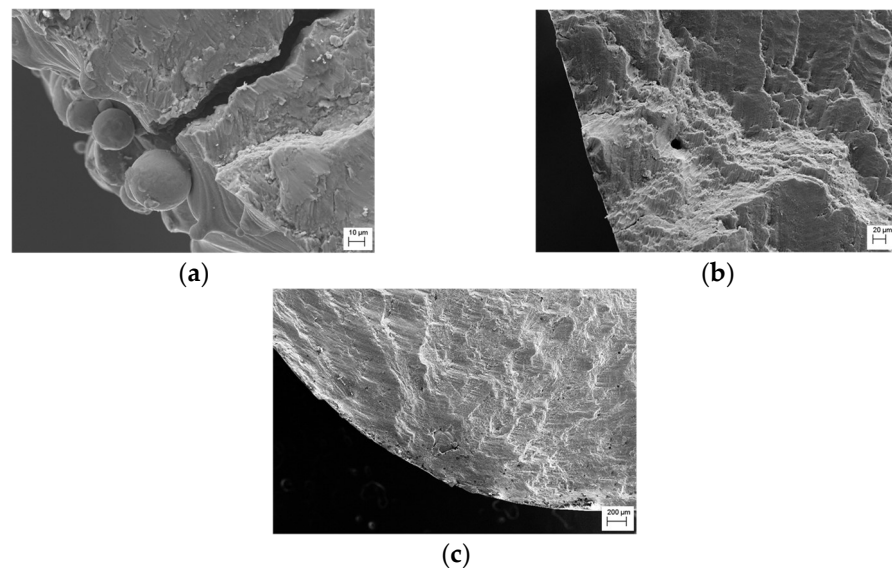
Fracture surfaces of fatigue samples, (a) conventionally heat-treated and as-built surface state, (b) conventionally heat-treated and machined and (c) HIPed and machined.
